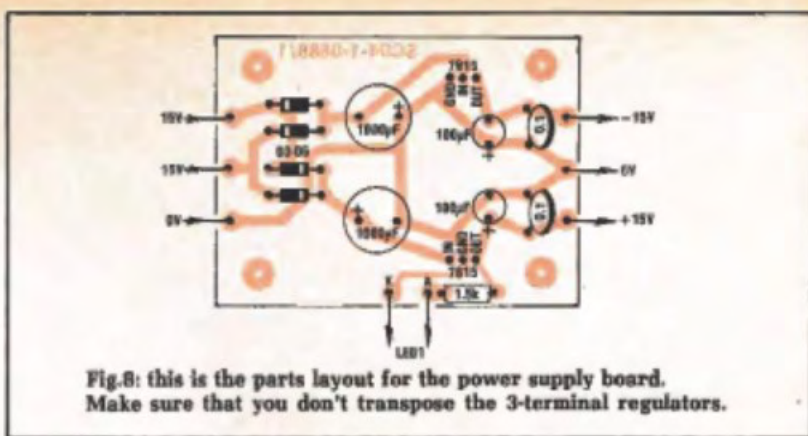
this is the parts layout for the power supply board. Make sure that you don't transpose the 3-terminal regulators.
